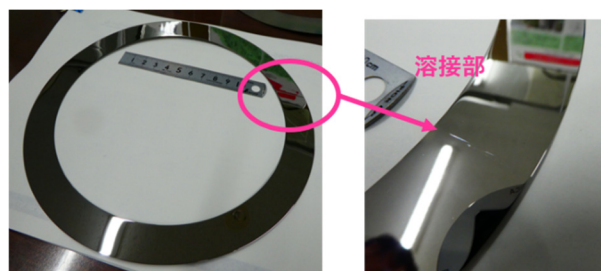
Photographs of the diaphragm made from a 45-degree welded plate.
